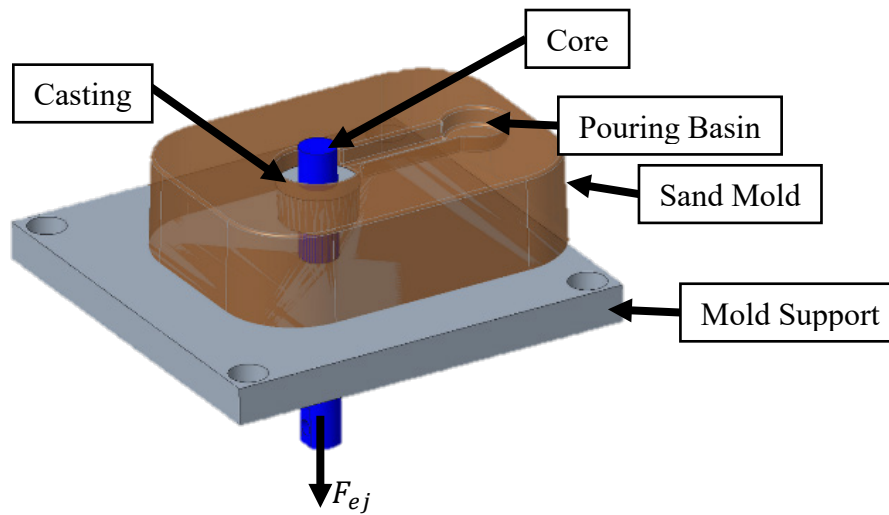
Assembly view of the hot ejection test apparatus the casting, core, sand mold, and support plate.
